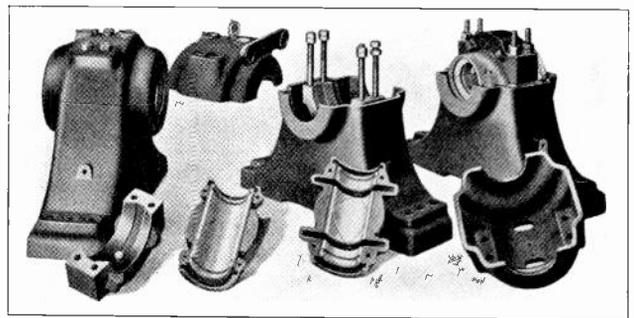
Pedestal type sleeve bearings, showing parts of one bearing and housing disassembled.
